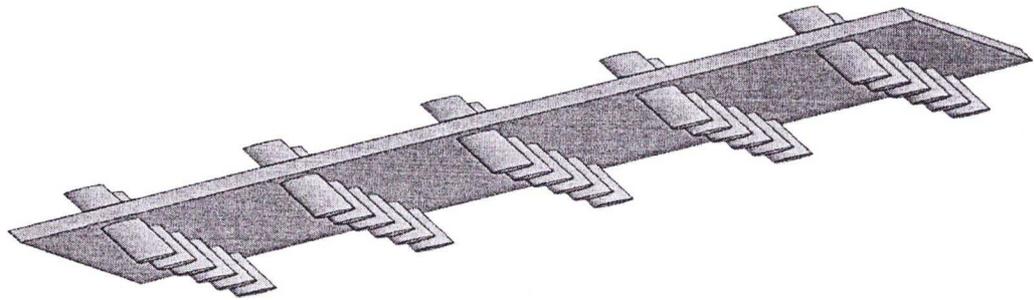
Finned and unfinned (bare tubes) parts for evaporator element
